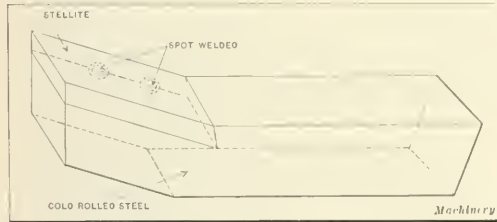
Tool made from Stellite Cutter spot-welded to Machine Steel Shank
